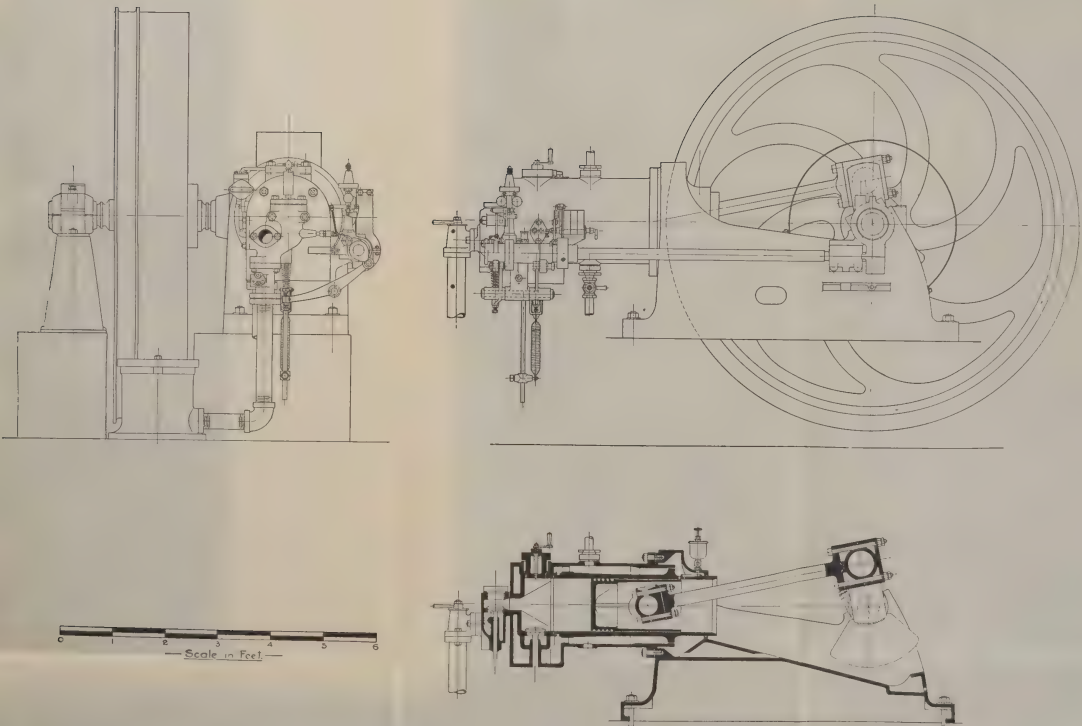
Forty horse-power gas engine. Department of Mechanical Engineering, McGill University.
